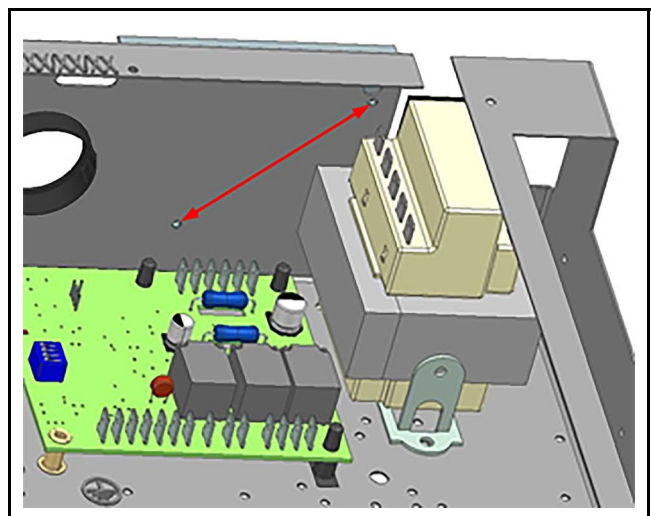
Holes Locations to be Marked (SM Control Box Bottom View)
